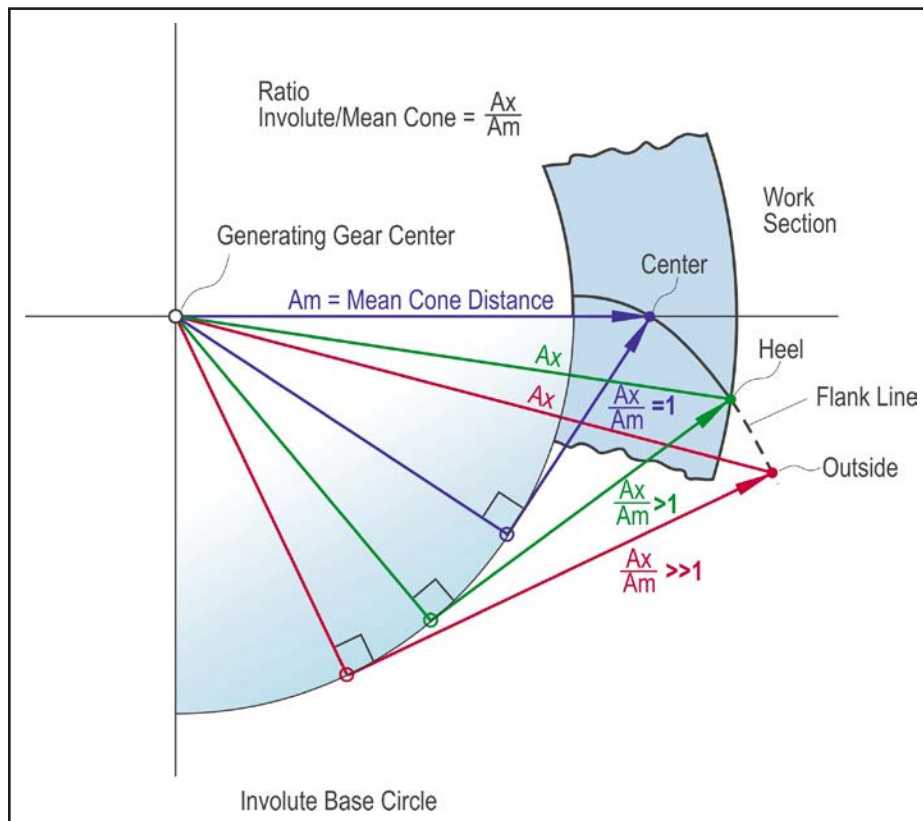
Involute-shaped flank line and relationship between involute and cutter radius.
